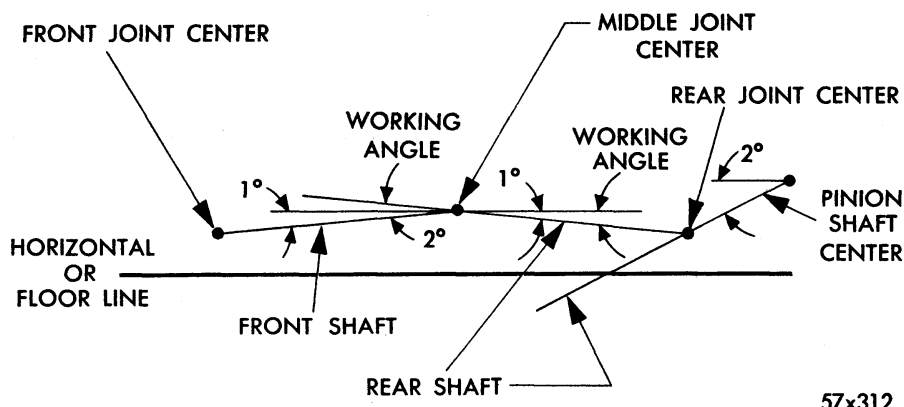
Determining Working Angles—Front and Rear Propeller Shaft
